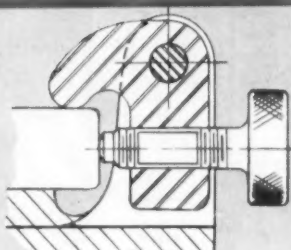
Drawing of a swinging clamp in which weight is an important factor in unclamping the work that is being held.
